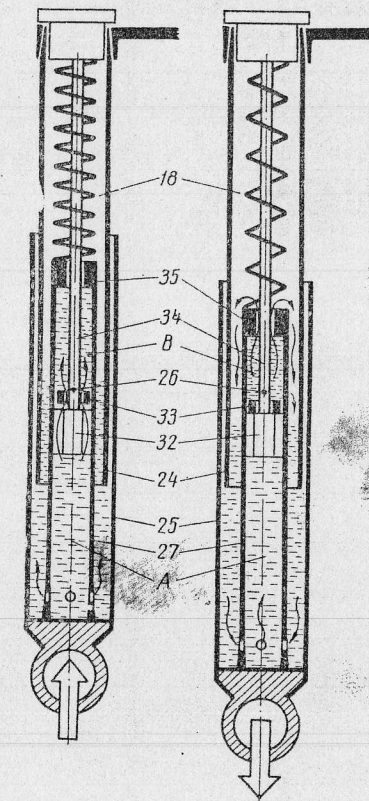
Working Layout of Front Fork Shock Absorber: to the left — spring compressed; to the right — spring released (component parts itemized as per Fig. 26)
